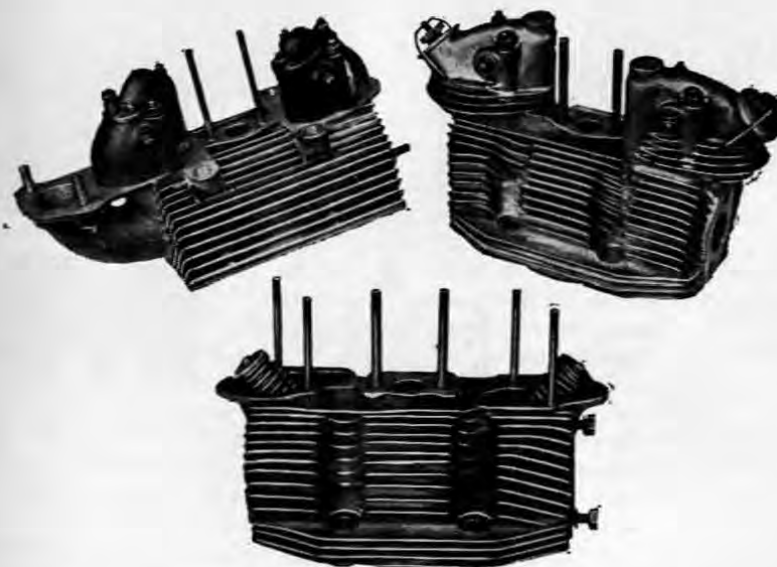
Development of the Tatra 111 cylinder head (top view).
